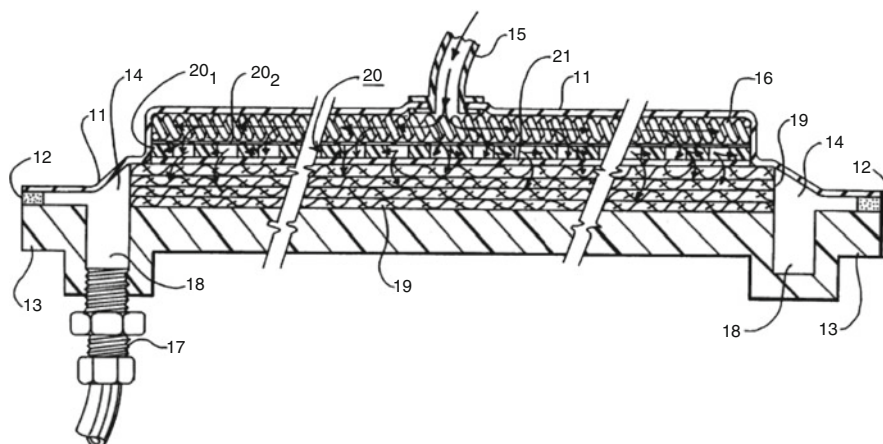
A cross-sectional view of a resin transfer molding assembly [33]
